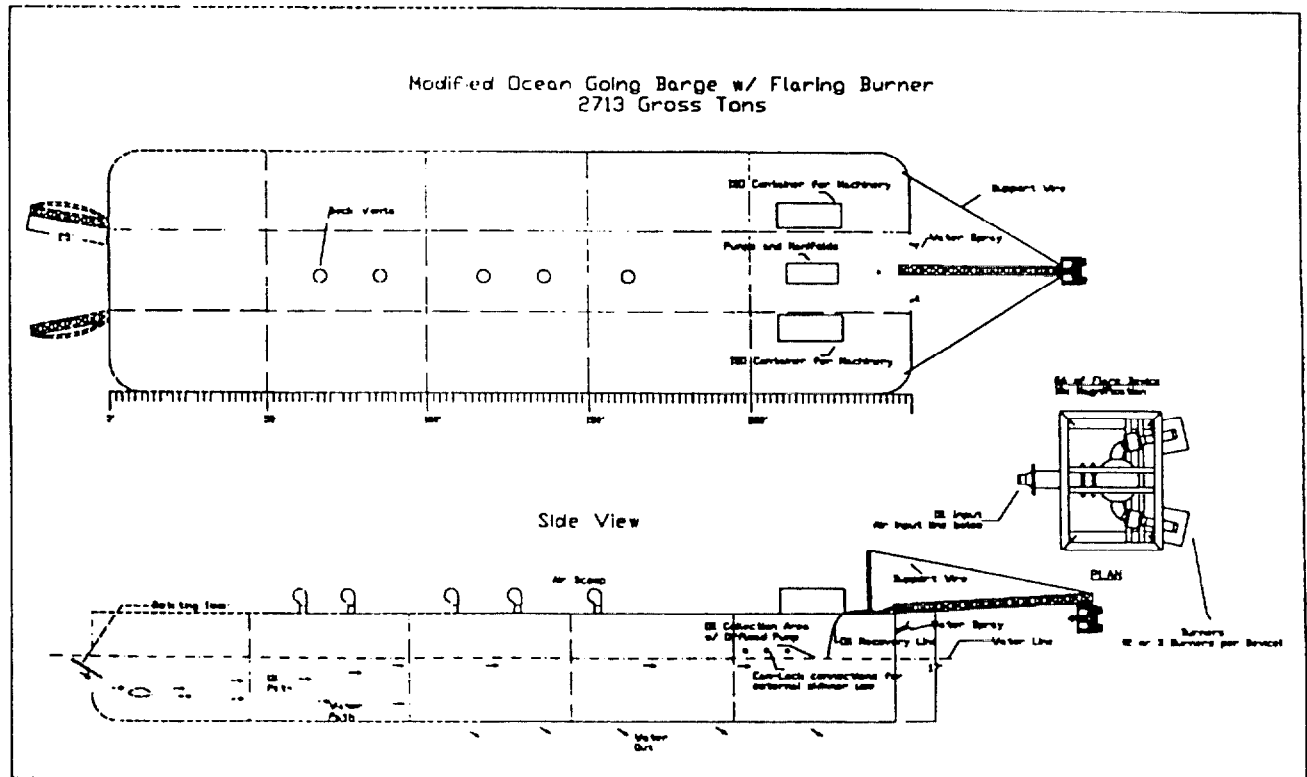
Basic Design for Concept IIB - Oil Burning Barge Equipped With Flaring Burner
